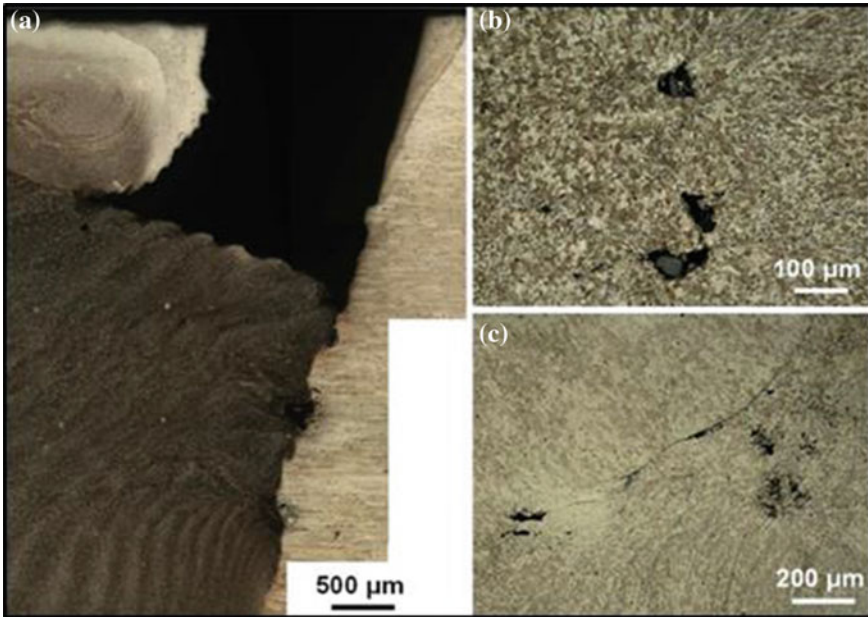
Welding defects formed under different process parameters: a 800 rpm–200 mm/min, b 1000 rpm–300 mm/min, c 1400 rpm–100 mm/min [31]
